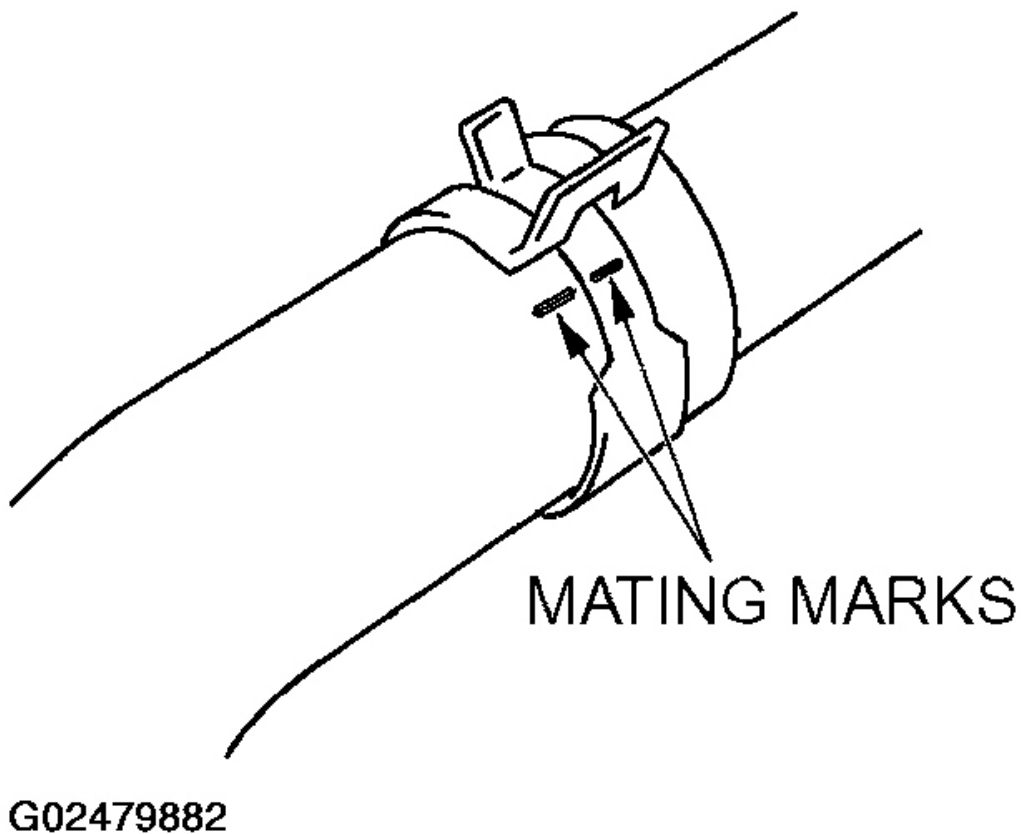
Identifying Mating Marks On Radiator Upper Hose And Hose Clamp
